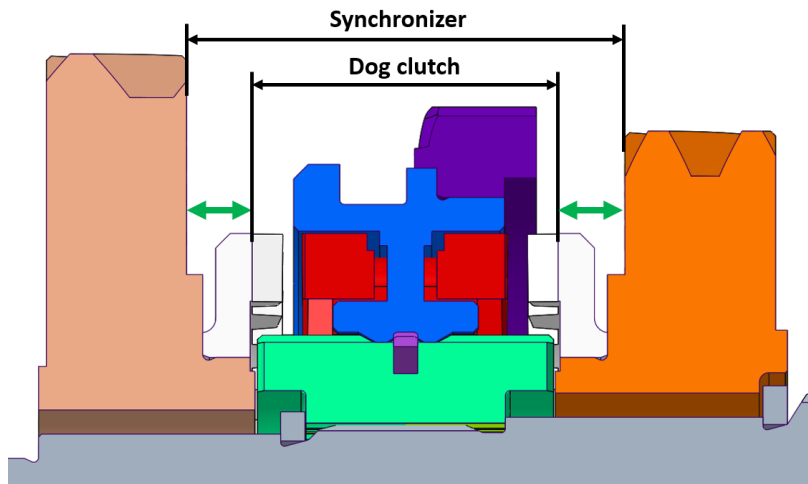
Possible axial length saving for 1st gear dog clutch compared to synchronizer
